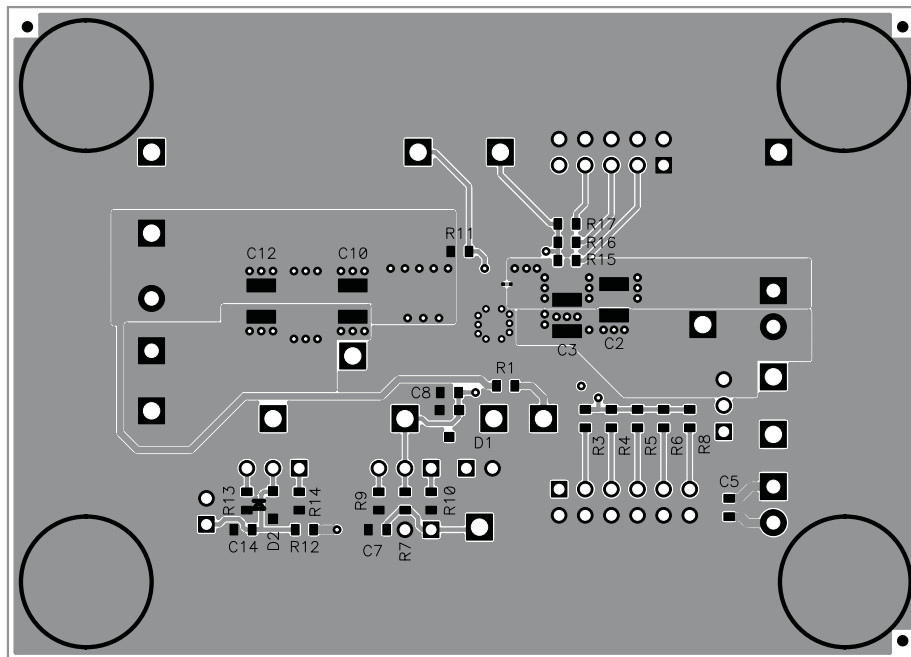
TPS84620EVM-692 Bottom-Side Layer and Assembly
